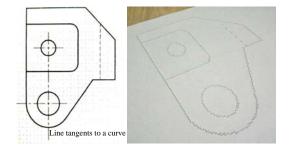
Example picture and its embossed picture printed from a Braille printer
